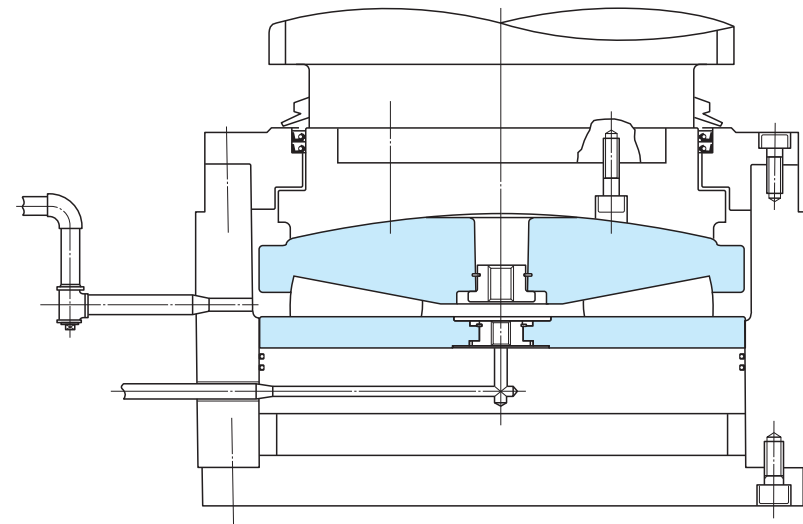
Adjusting Screw Thrust Block, Hot Strip Rolling Mill
